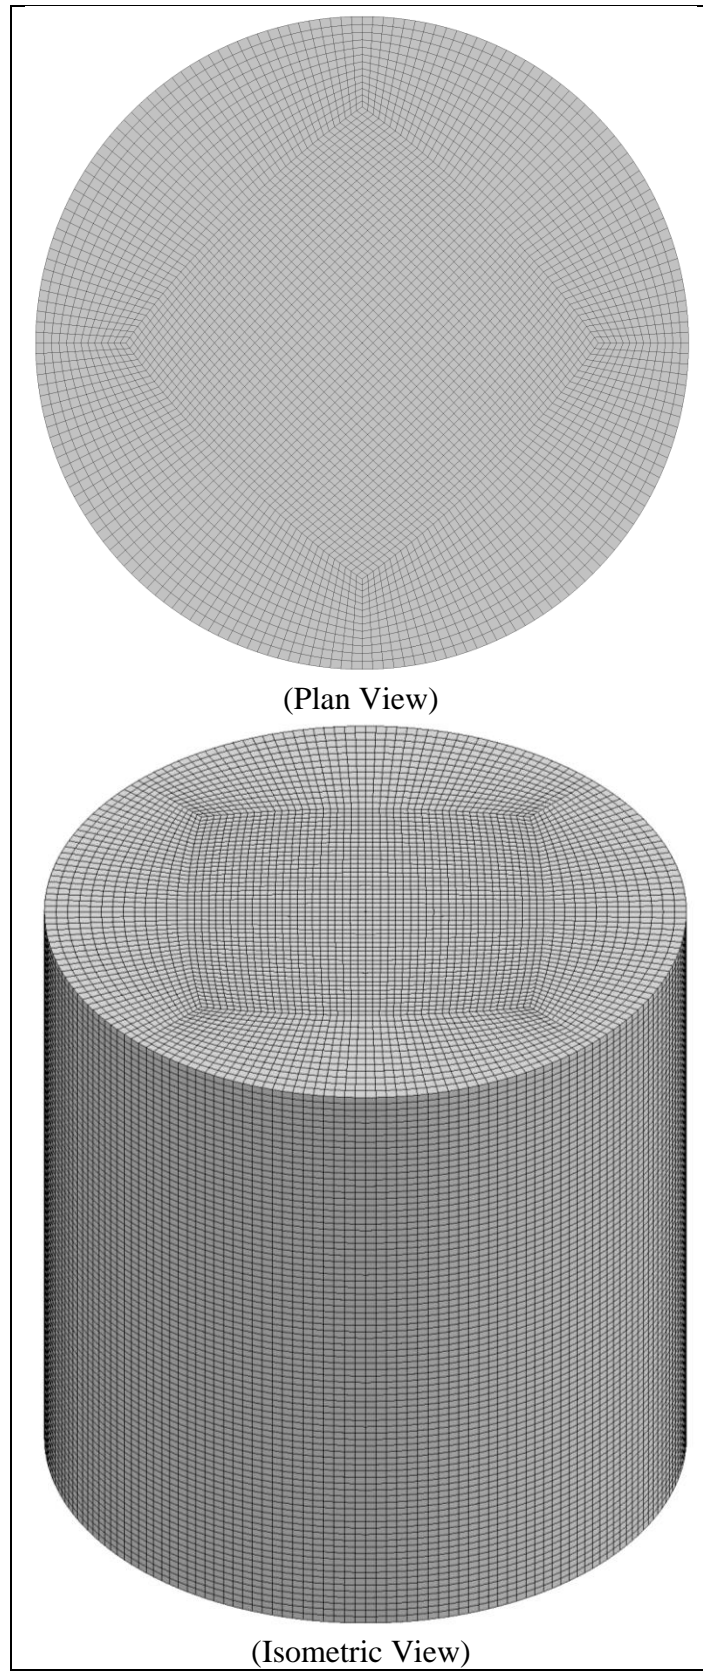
Plan and Isometric View of Cylinder Upsetting FEM Model
